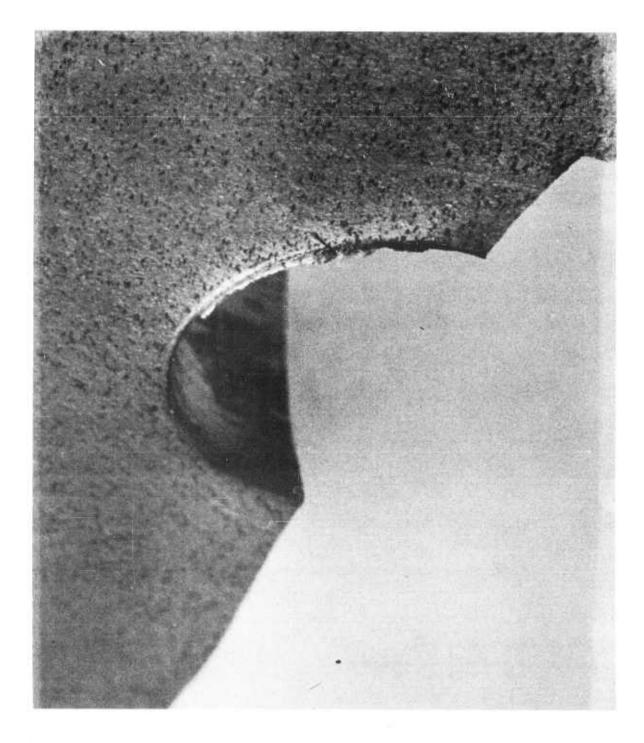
Rear Spar Fracture Area -- View of Crack in Burr
